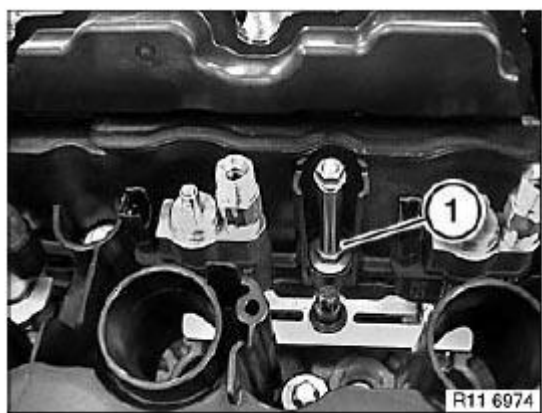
Releasing Screw Using Special Tool (11 8 620)
